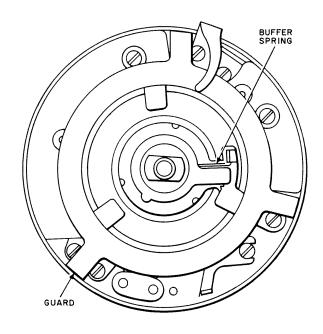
5-Type Dial Showing Buffer Spring and Metal Guard
